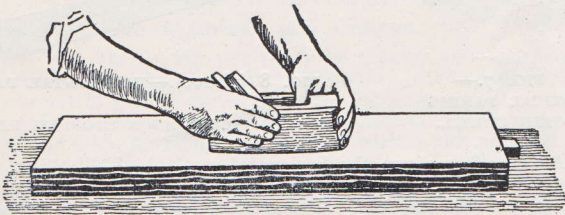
HOLDING THE SMOOTHING PLANE.
